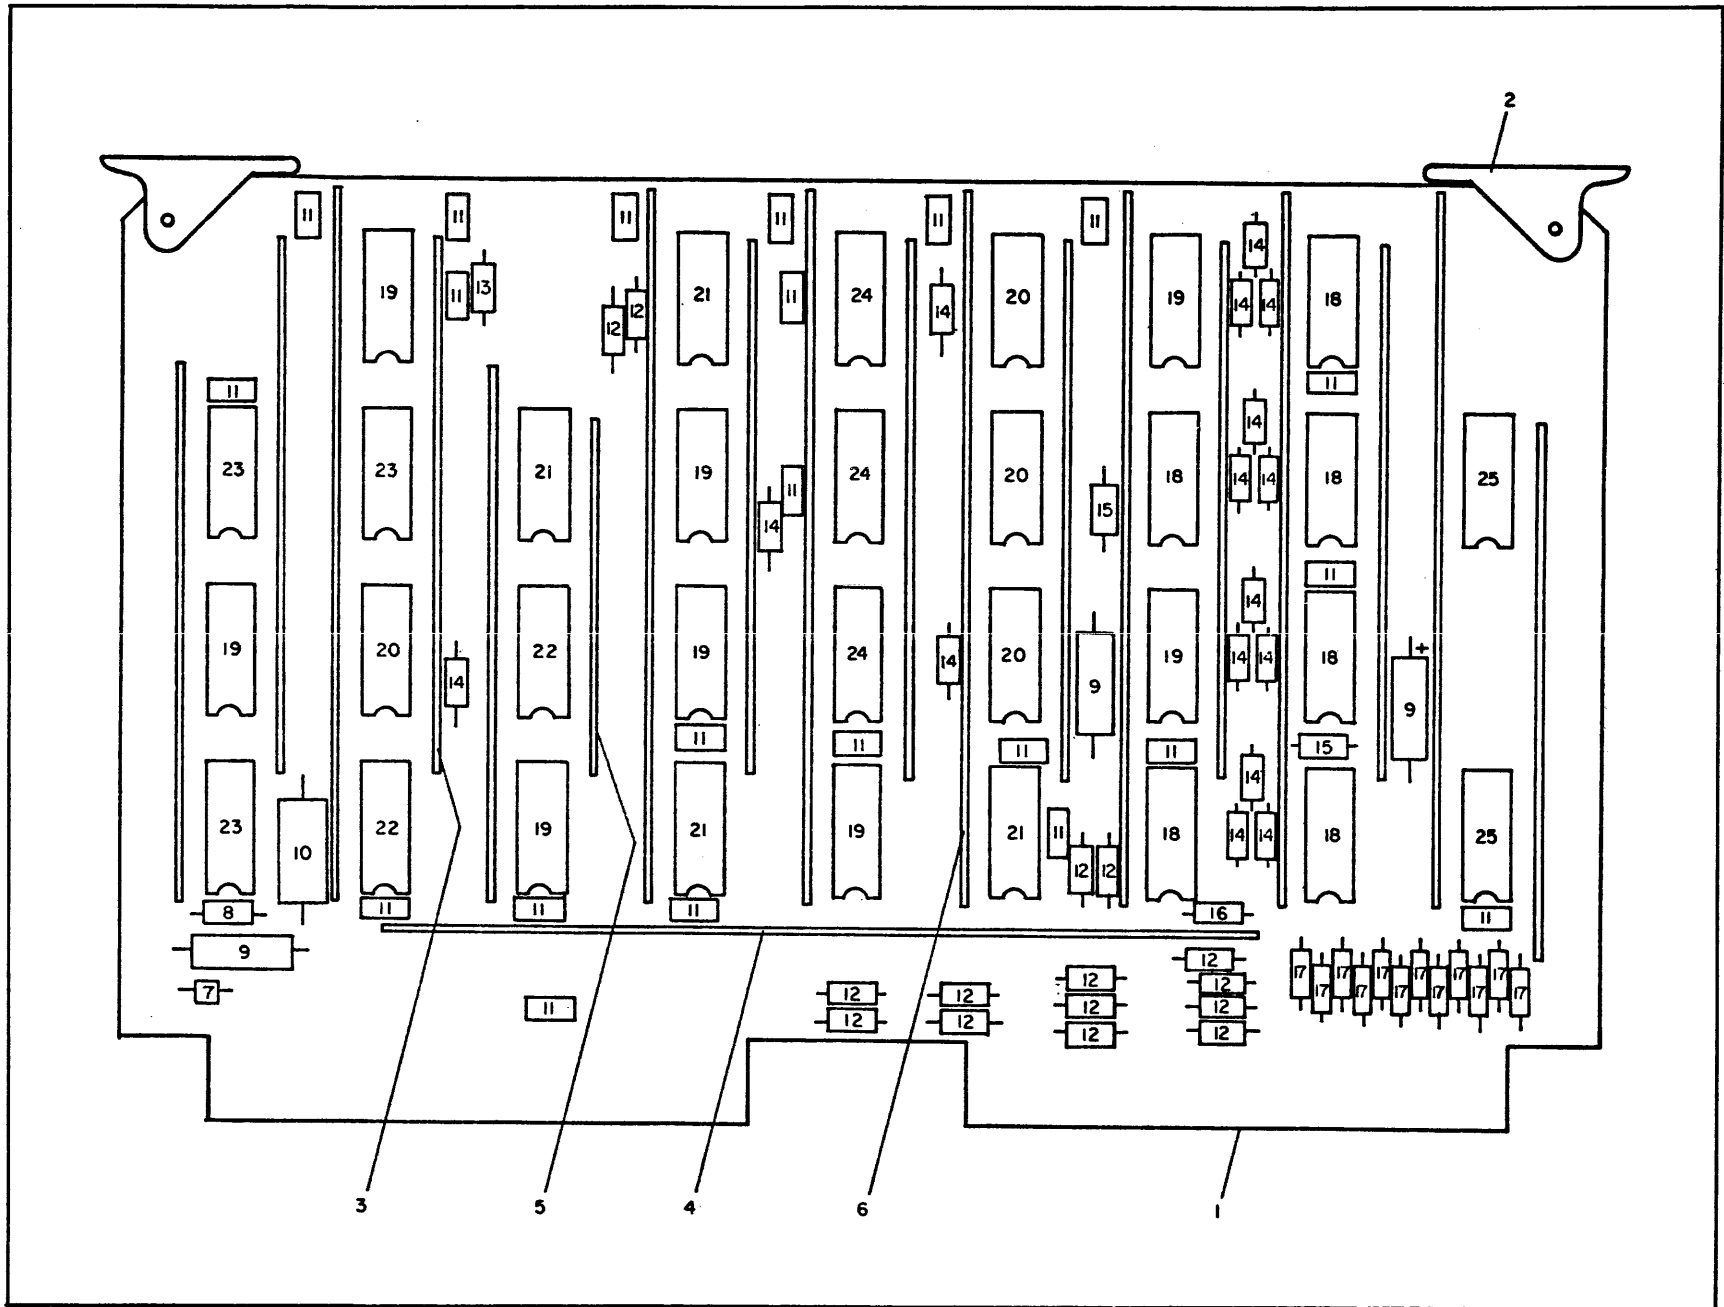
PC ASSEMBLY - CONTROL CARD
